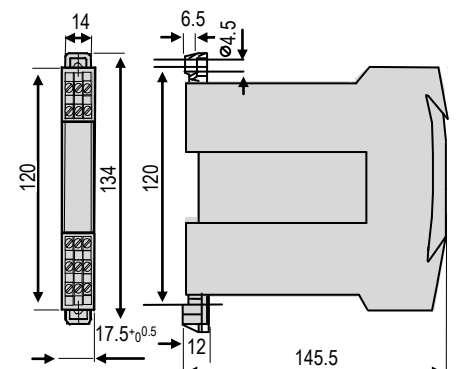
RISH Ducer TV 808 in housing 17 screw hole
